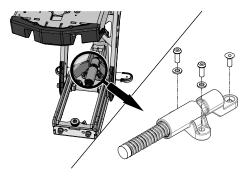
Assembling the spring unit, it is attached with three screws and washers.
